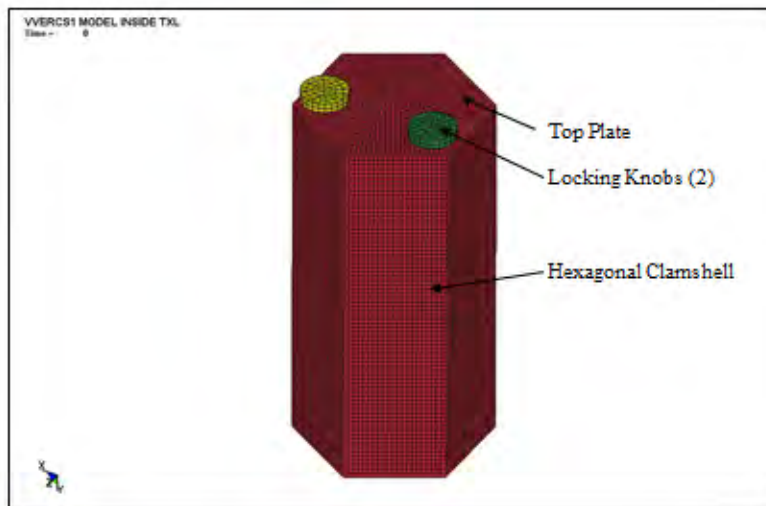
Traveller VVER Clamshell Model Showing Key Components
